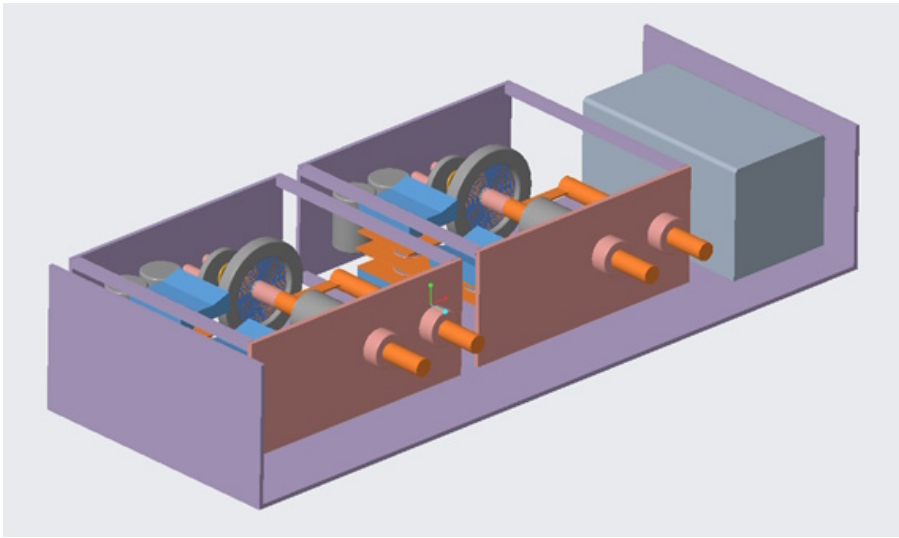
3D Switch Gear Drawer Layout for Bulkhead Mounted switches
